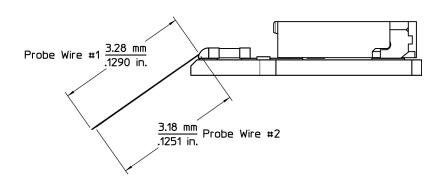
N2884A Fine Wire ZIF Tip Dimensions
